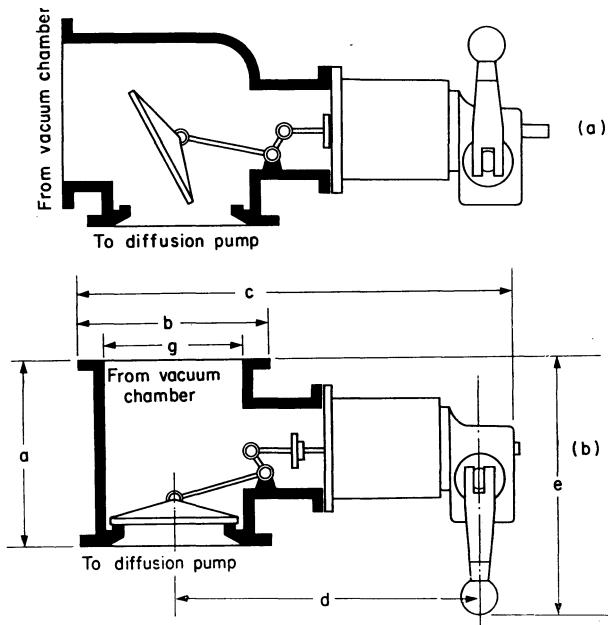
Dimensions of flap valves supplied by Balzers⁴⁴⁴; (a) elbow valves; (b) straight-through valves (Table 6.15)
